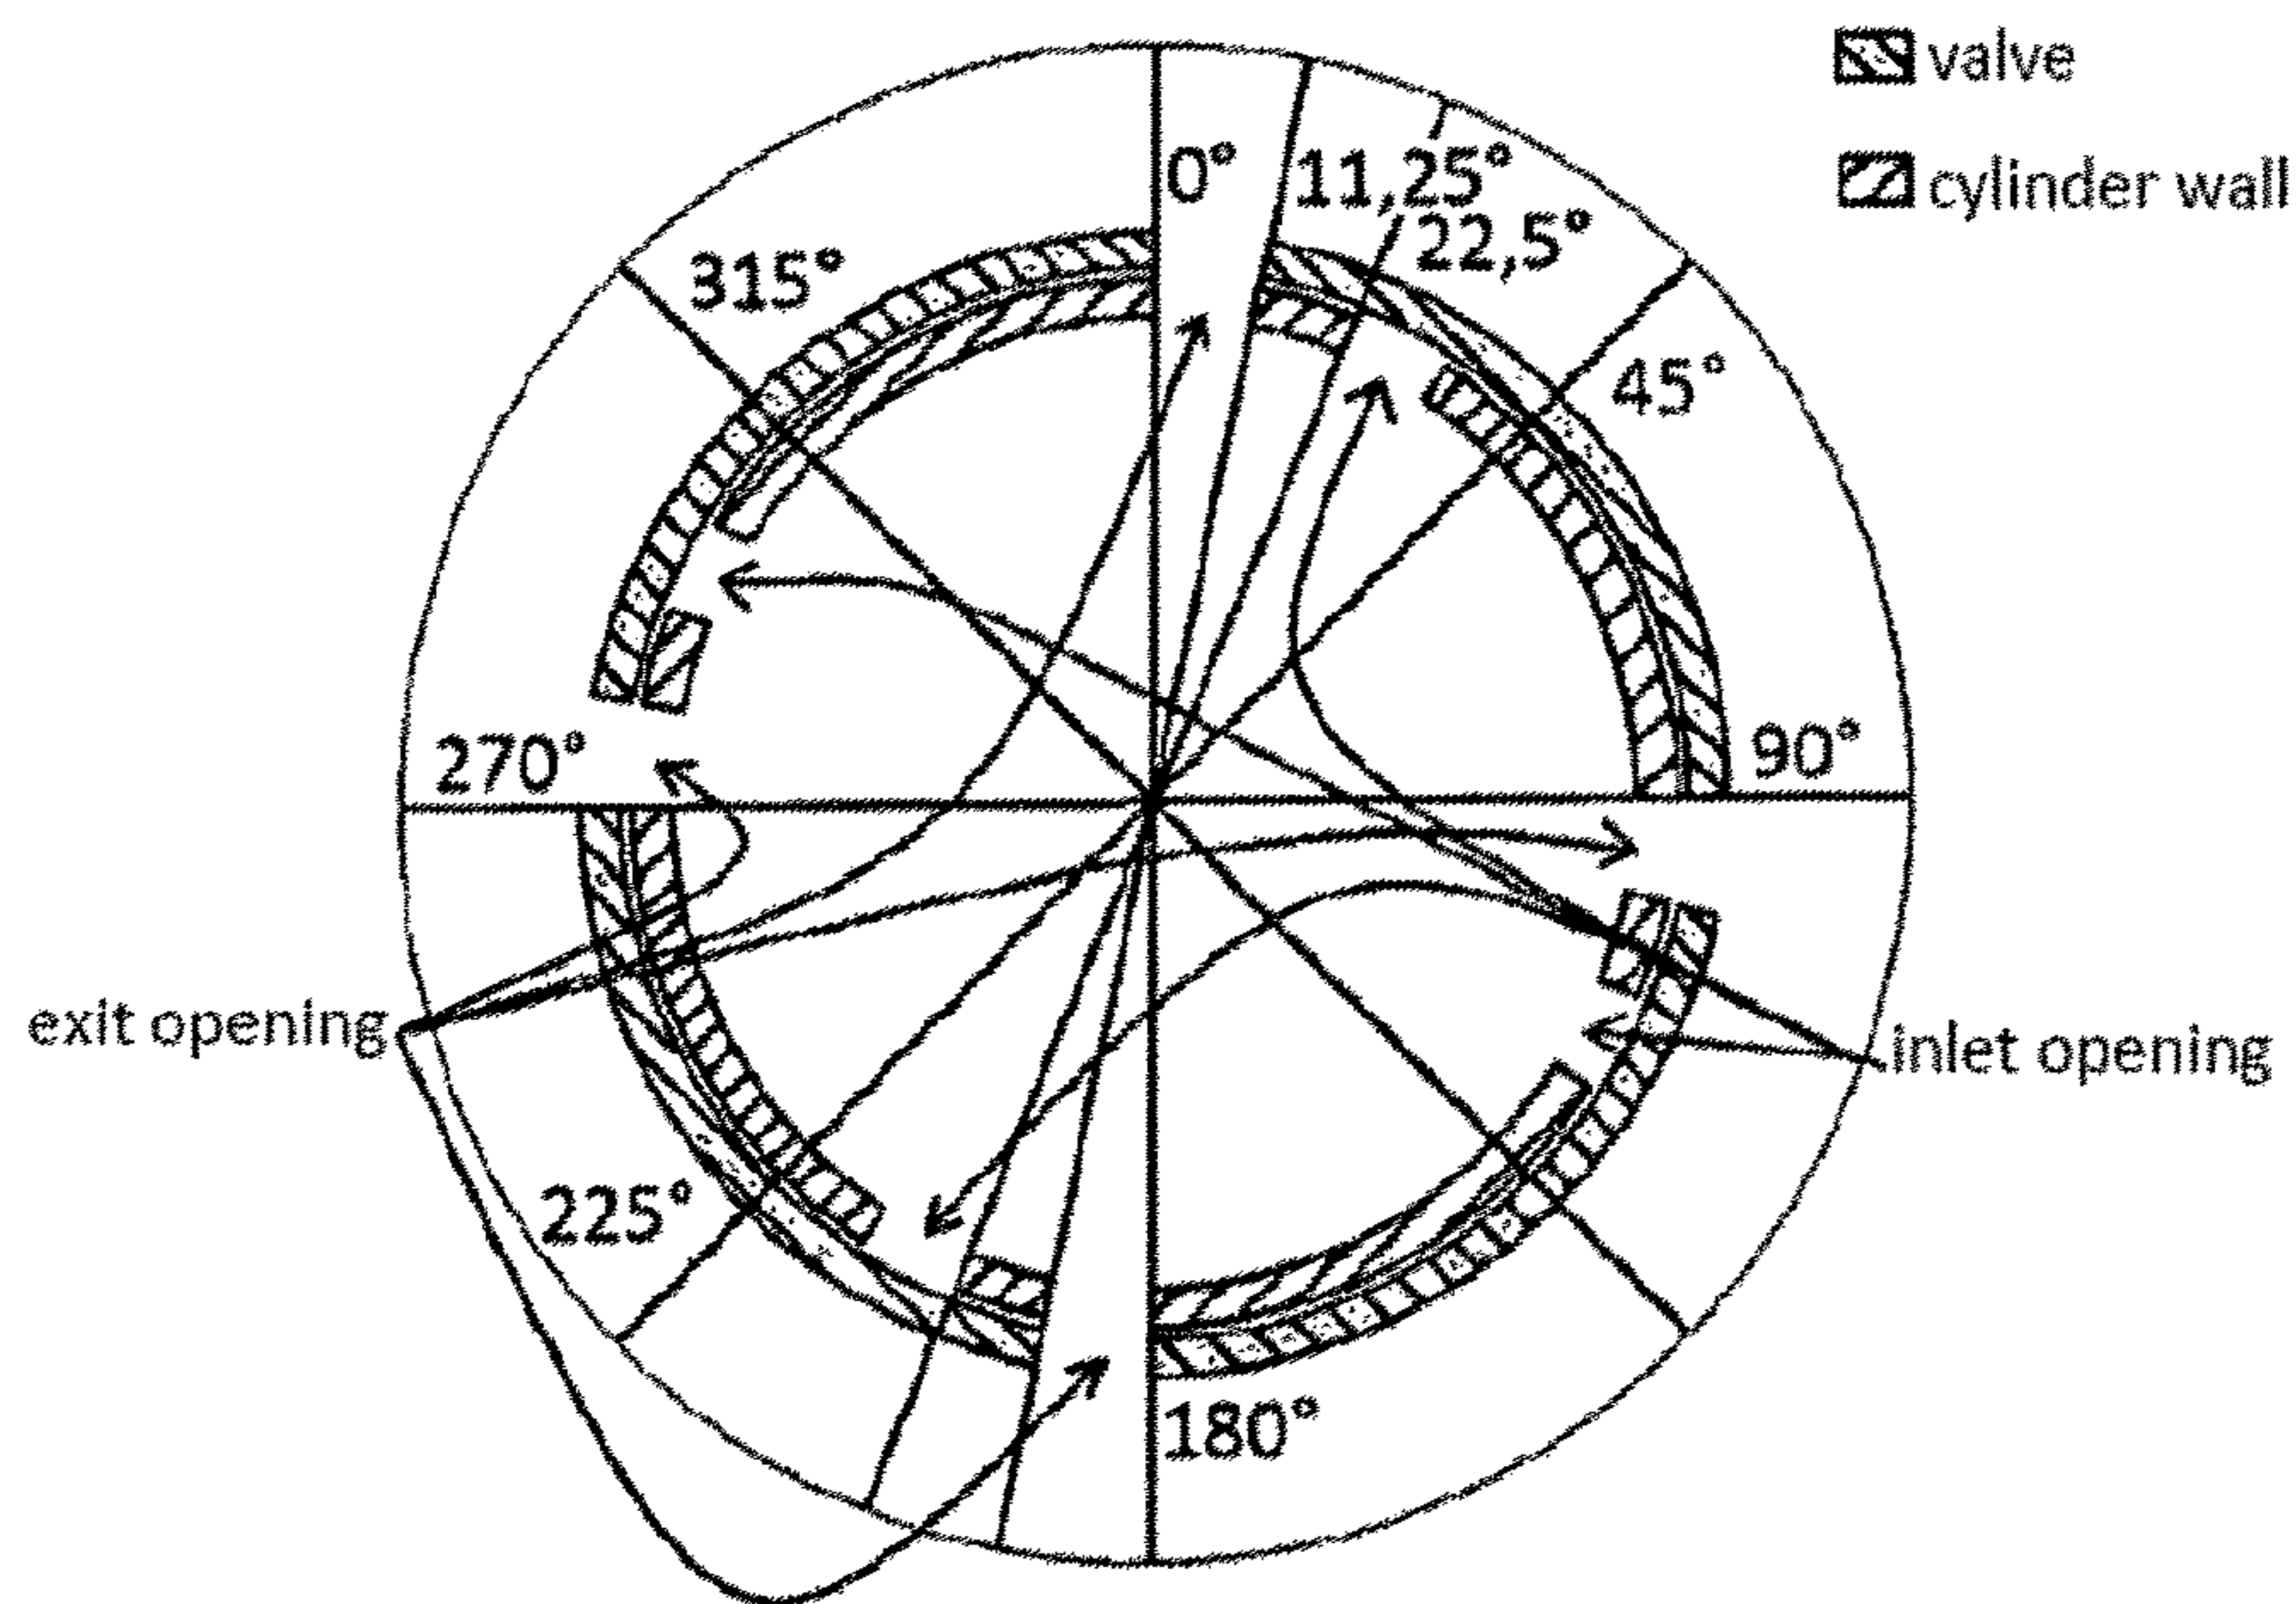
Cross-section of a rotary valve with 4 openings around a cylinder of a four-stroke engine
